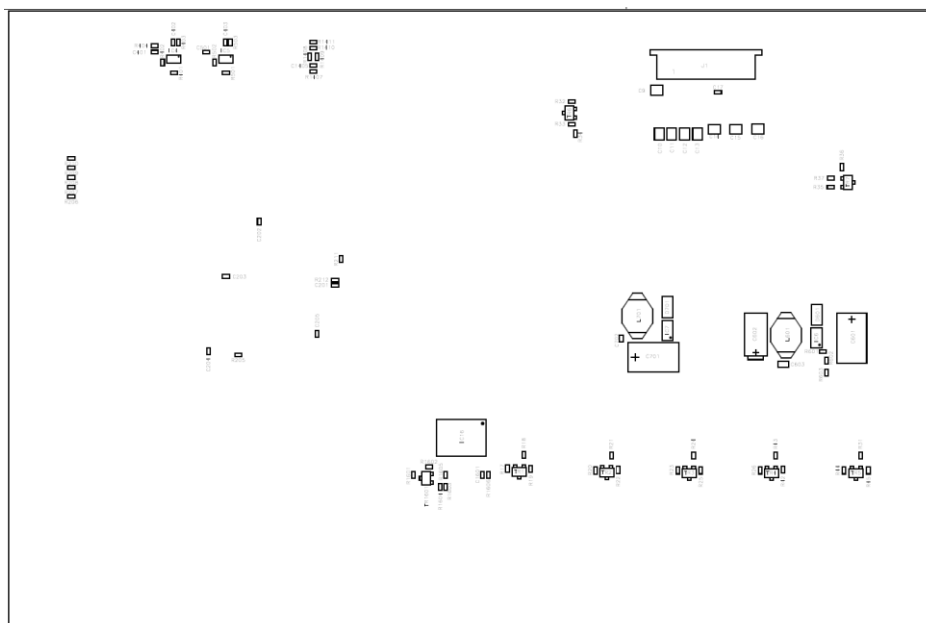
Mechanic Drawings of SMPS Transformer Test Device, bottom side
